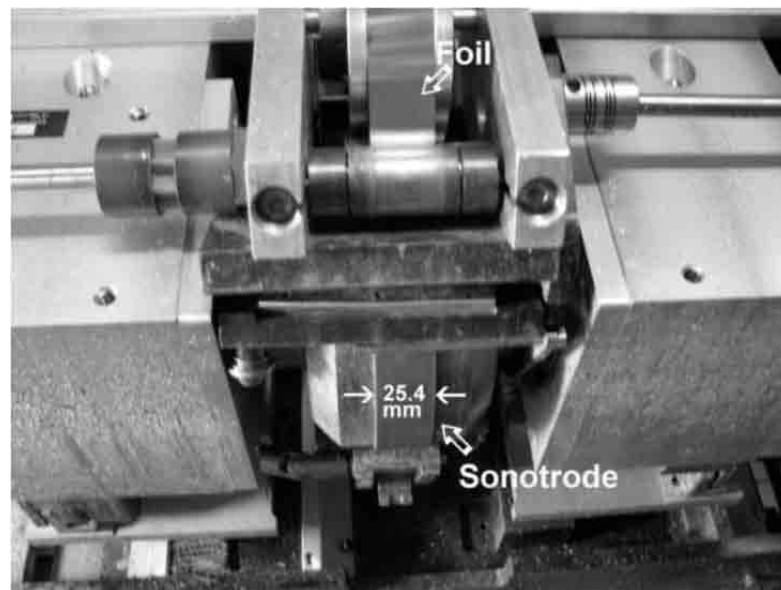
Close-up view of the Welding head, showing the sonotrode from below (as shown in [11])
